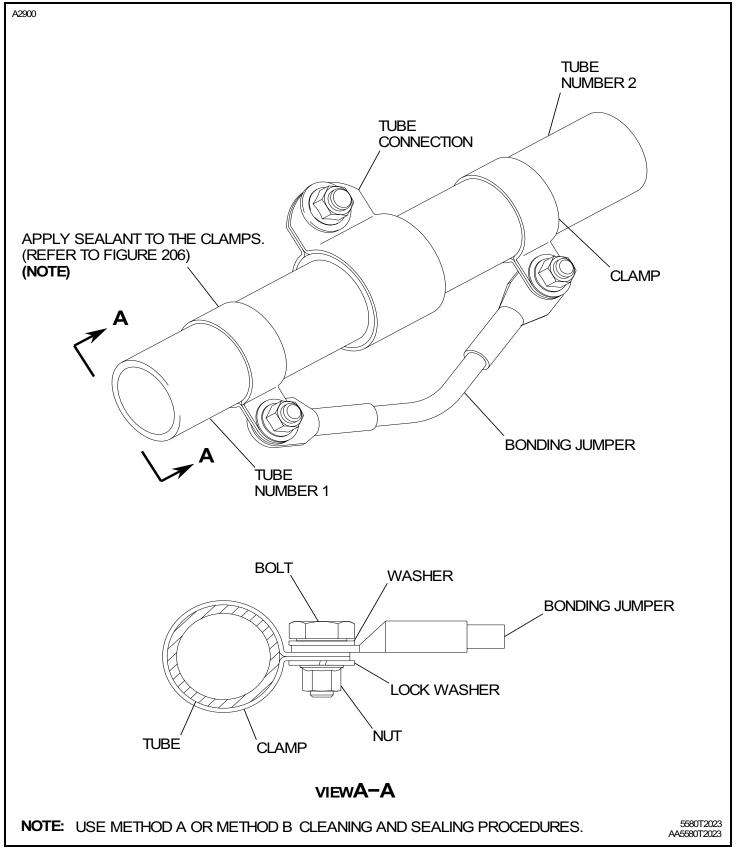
Sheet 1 : Electrical Bonding - Typical Bonding Jumper Installation for Continuity of Plumbing
